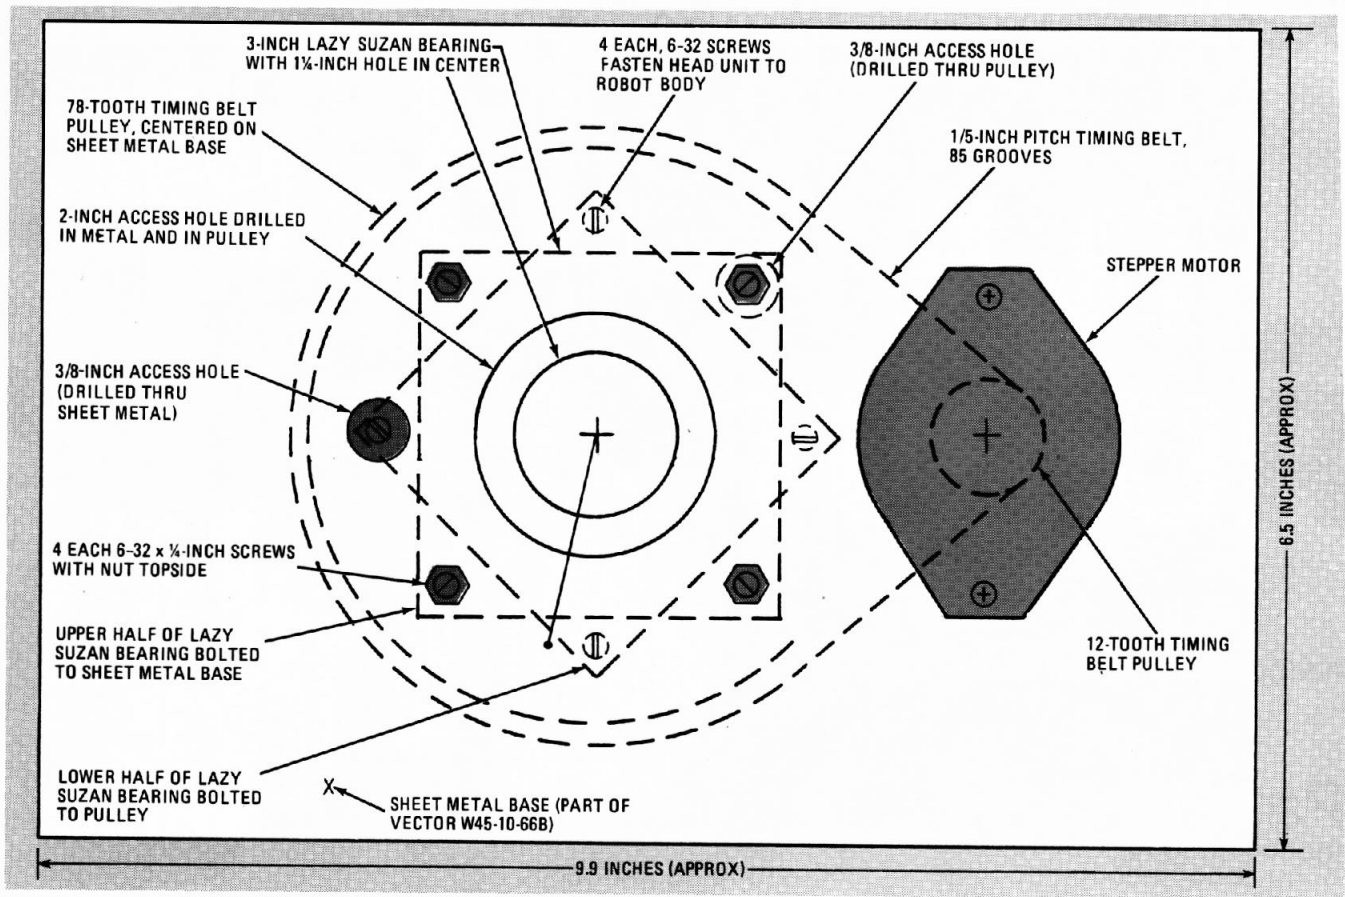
THE HEAD'S DRIVE-TRAIN is detailed in this top view.
